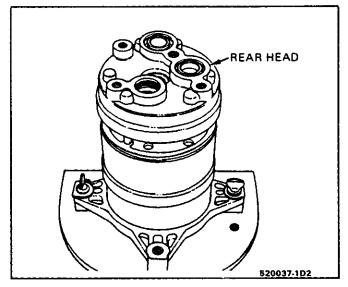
Rear Head Assembled Onto Assembly Guide Pins
